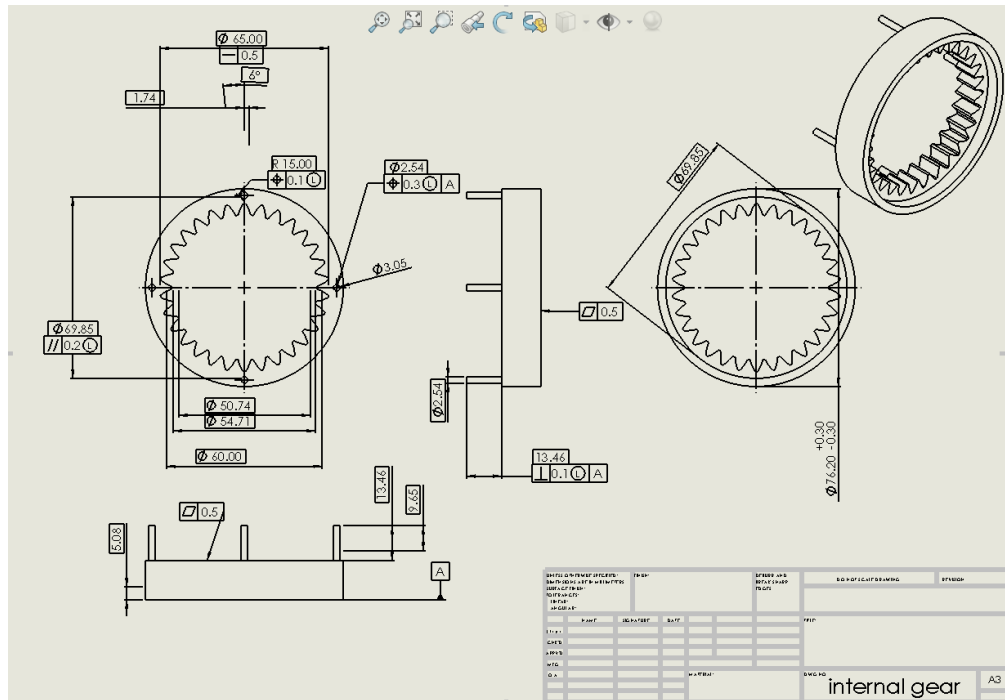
Engineering Drawing of SCARA Internal Gear (millimeter precision)
